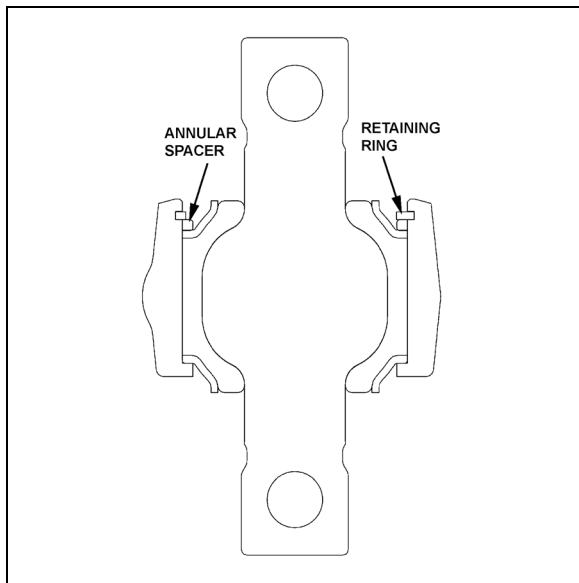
LOWER A-ARM BAR PIN BUSHING 16047
